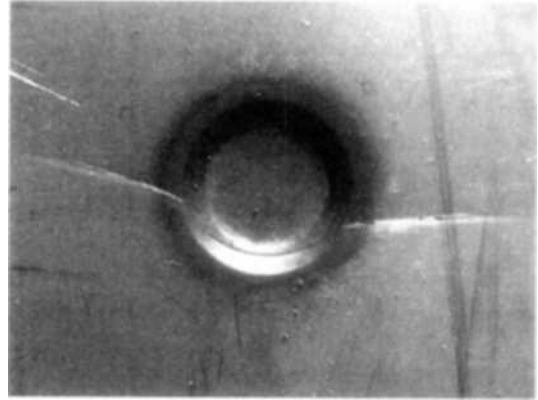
Fatigue crack revealed at the nugget edge on the outer surface of the specimen
